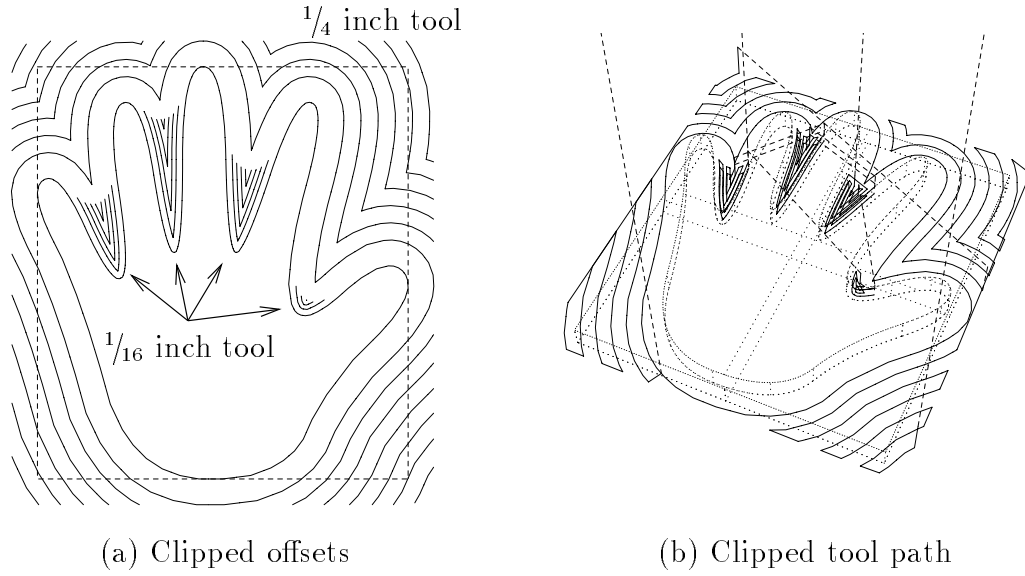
Clipped offsets and tool path for multiple tools machining
